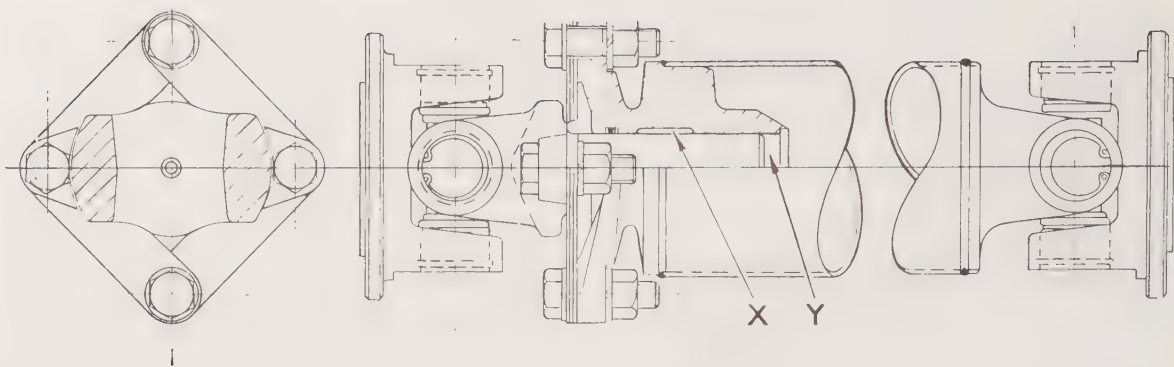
15 Strap drive propeller shaft (for X and Y refer to text.)
